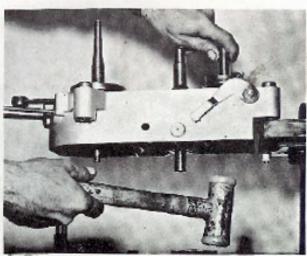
Rotate the rear driveshaft until the splines are in line and gently tap out with a soft mallet.
